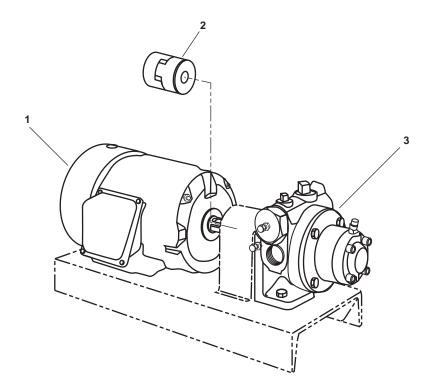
Prelubrication Oil Pump (Sheet 1 of 2)
